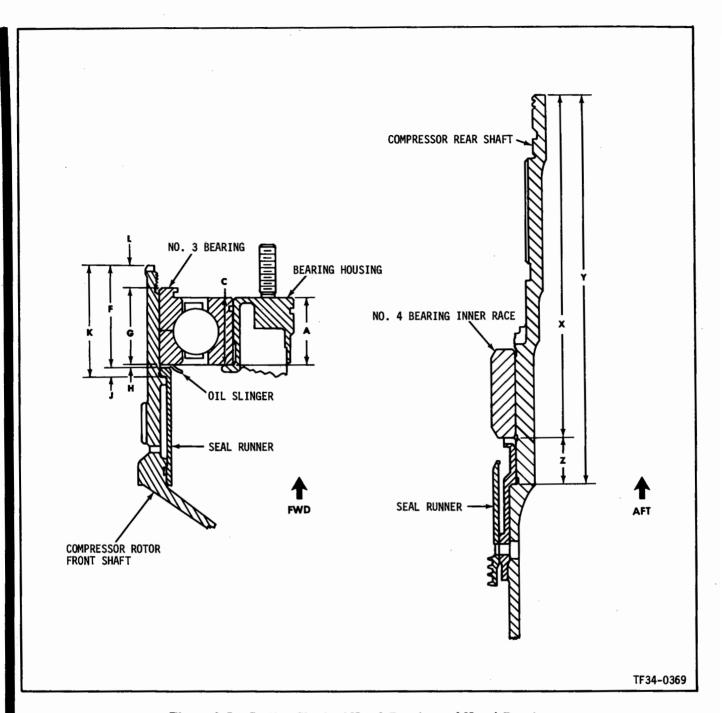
Seating Check of No. 3 Bearing and No. 4 Bearing
